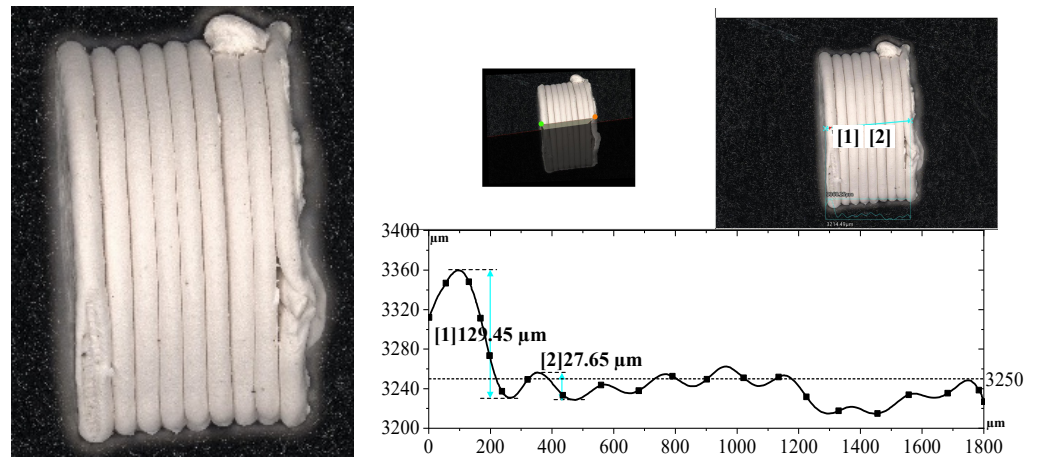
3D side view and 2D cut surface profile of the FDM-printed mmWave DRA element.
